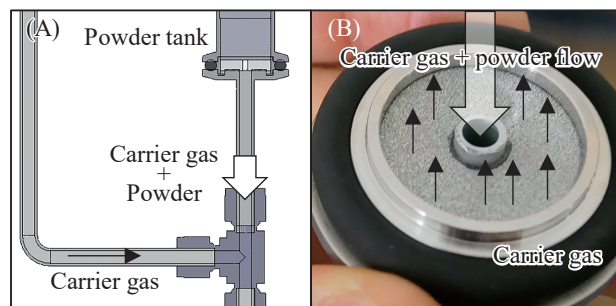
(A) Enlarged half-sectional view of a CAD model of the lower part of the powder tank, and (B) the appearance of the carrier gas inlet and outlet for the carrier gas/metal powder mixture.
